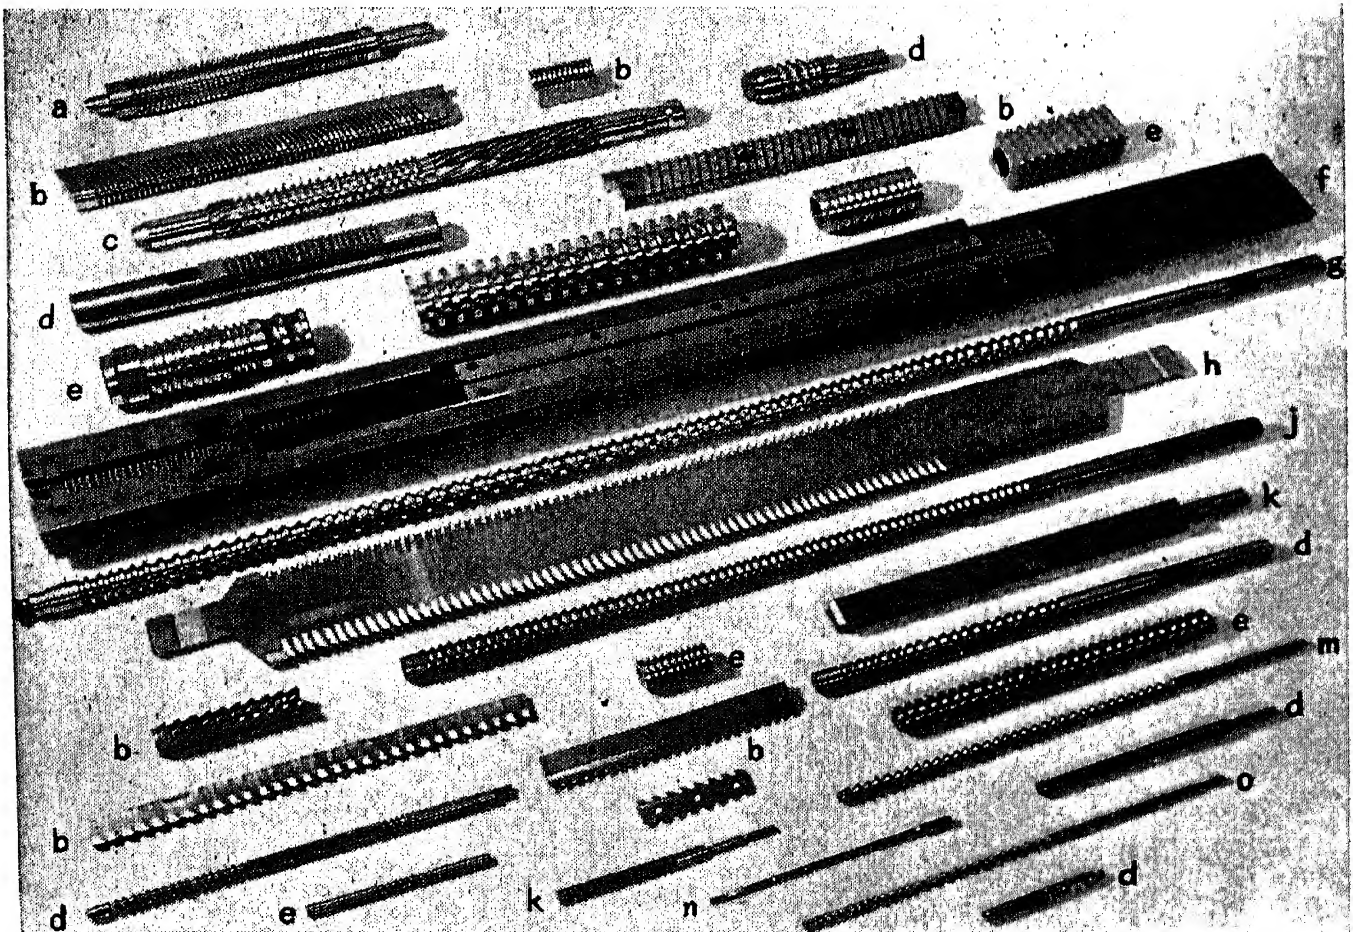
Typical broaches. (Courtesy Continental Tool Works, Ex-Cell-O Corp.) a. Combination hole sizing and involute spline push broach. b. Broach sections. c. Spiral spline hard gear pull broach. d. Push broaches. e. Broach shells. f. Broach inserts assembled in holder. g. Rotary cut pull broach for round hole. h. Slotting broach. j. Hole sizing and spline cutting pull broach. k. Flat broaches. m. Spline pull broach. n. Keyway broach. o. Combination hole cutting and burnishing pull broach.
